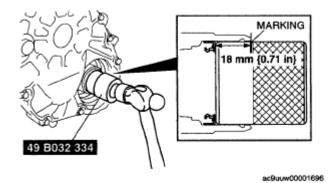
Tapping Oil Seal Courtesy of MAZDA MOTORS CORP.
